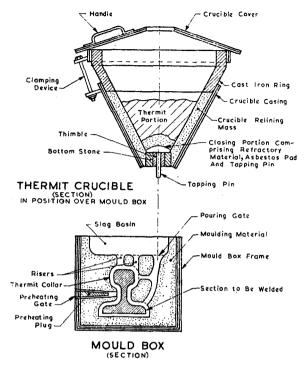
SET UP OF APPARATUS FOR A THERMIT FORM OF WELD
